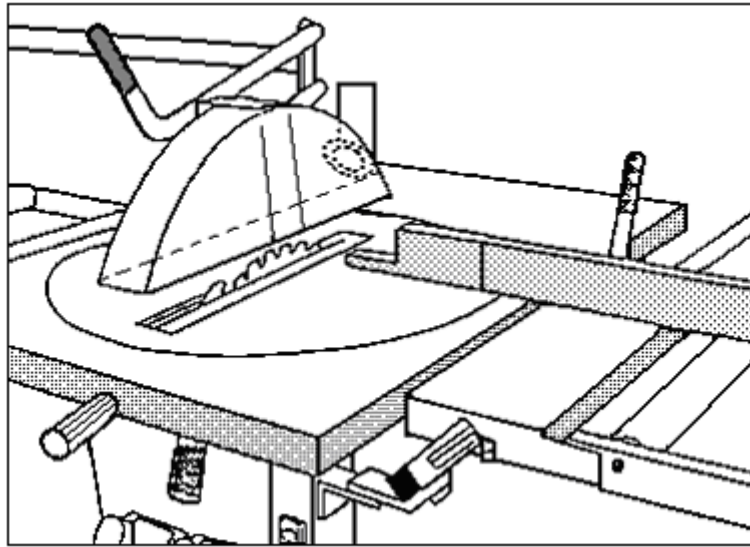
Example of a machine in the cross-cutting mode with moved workpiece
